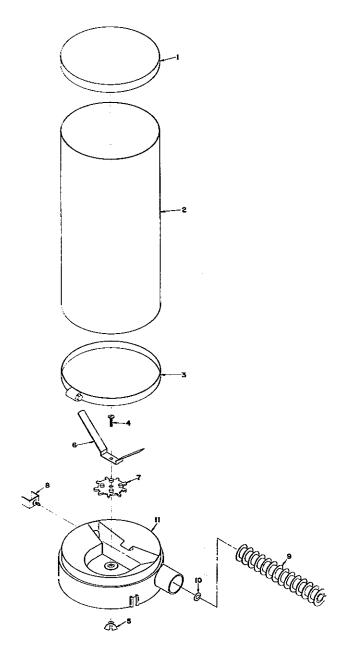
COFFEE, CREME AND SOUP CANISTER ASSEMBLY COMPLETE
